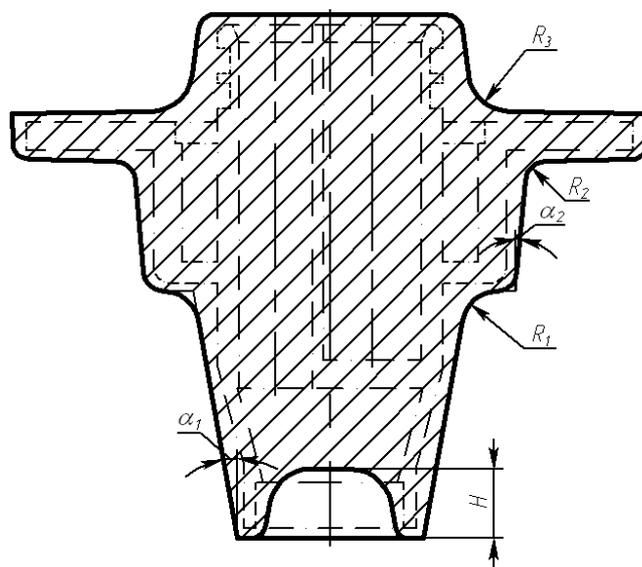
Drawing of forged part (chain line corresponds to machined part)
